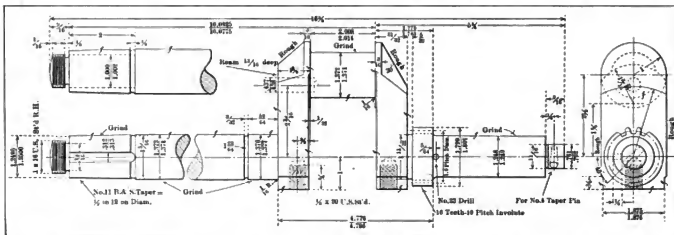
Crankshaft as used in the Brush Runabout, for a single cylinder vertical motor, and balanced for high speed
